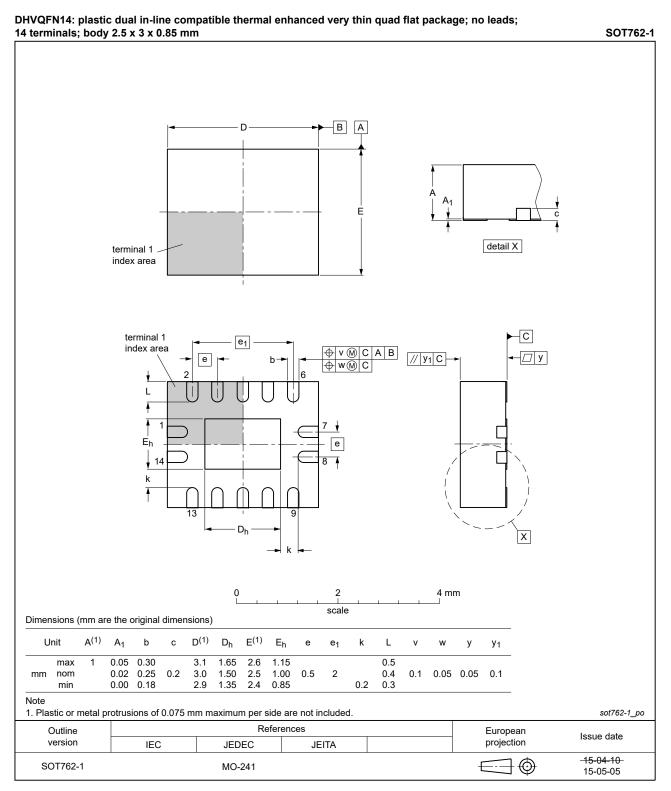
Package outline SOT762-1 (DHVQFN14)
